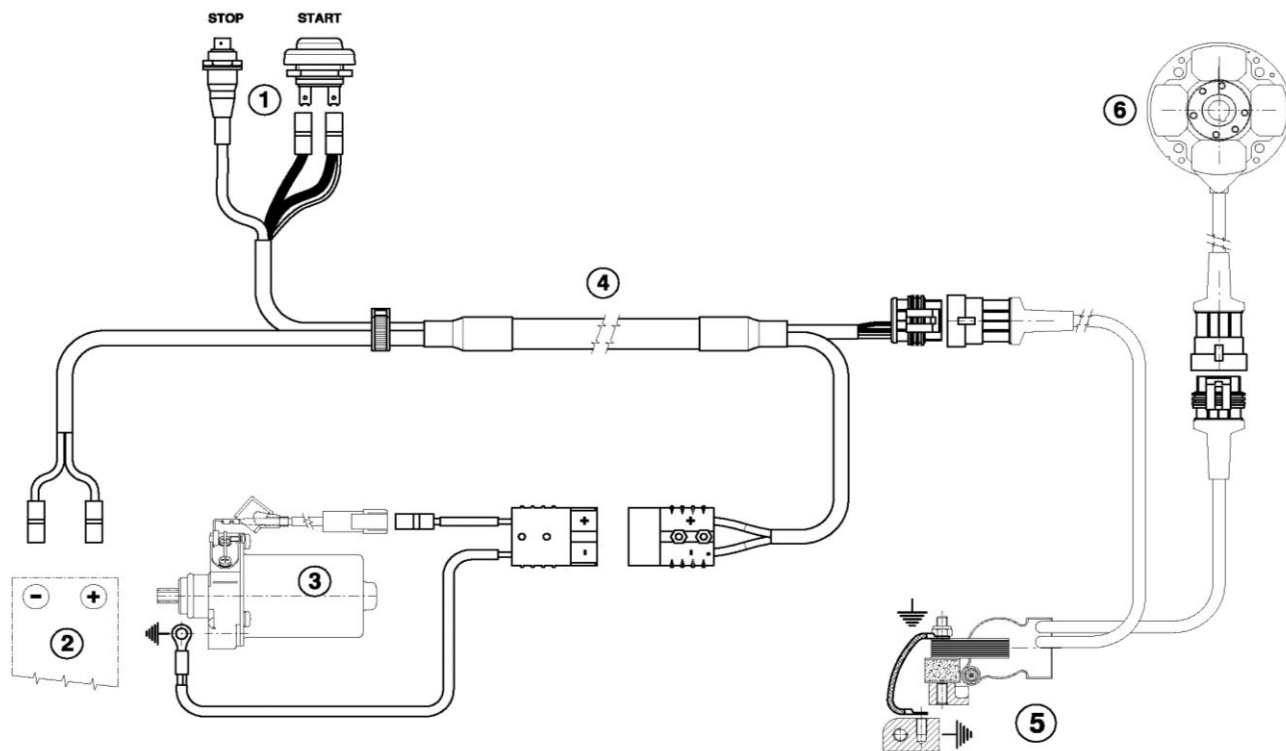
PHOTO COMPLETE ALTERNATIVE WIRING LOOM
